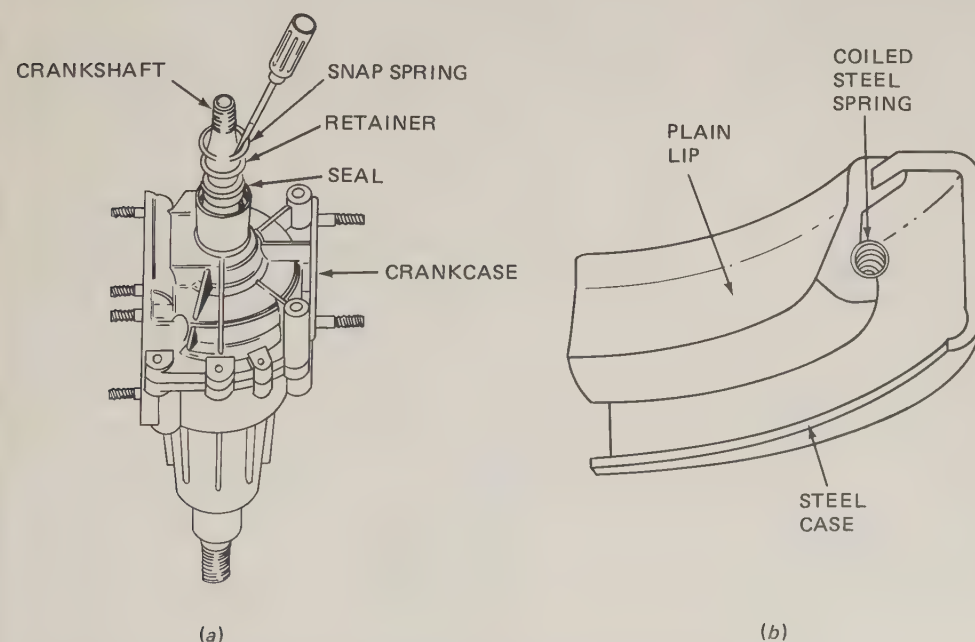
(a) Removing snap ring to permit removal of oil seal. (b) Sectional view of a typical oil seal. (Selastomer Division of Microdot, Inc.)
